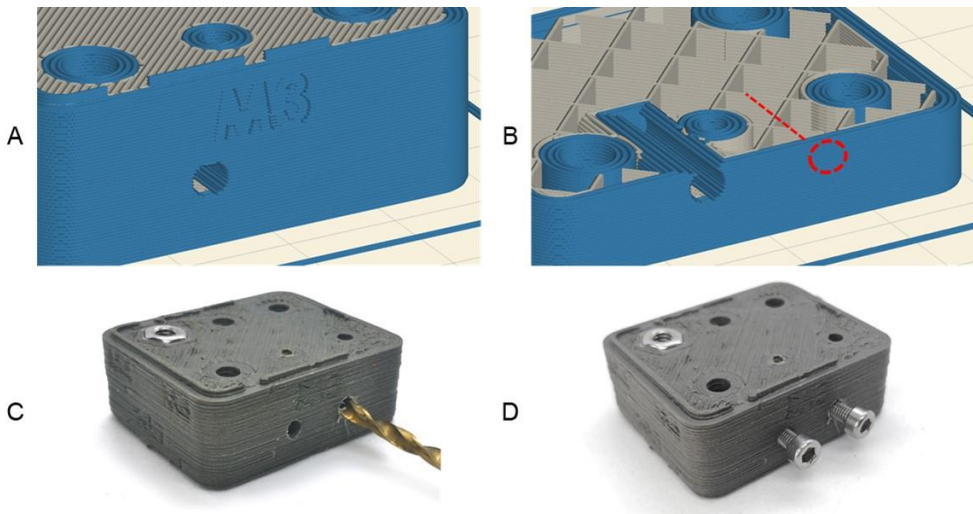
Drilling a hole in a FFF component. A) layers of the component; B) cross-section with the infill visible and the planned drill in red; C) Drilling ; D) Misalignment of the bolt.
